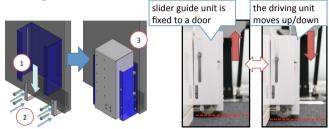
(Left) Fixing the unit to the door without a punch, (Right) Slide mechanisum for driving force optimization
